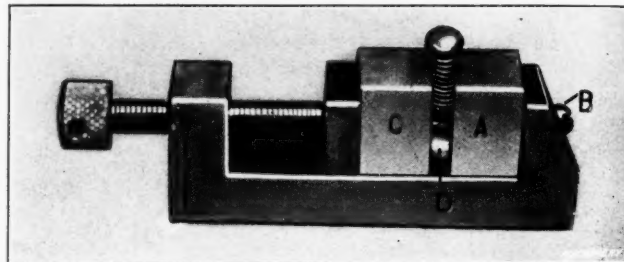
Small Machine Vise, made by adding Jaws to a Toolmaker's Clamp
